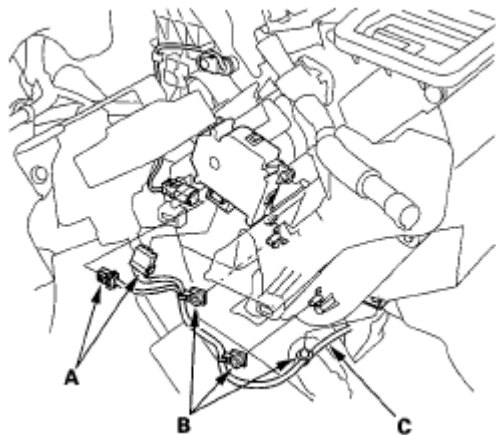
Identifying Driver's Air Mix Control Motor Connector And Wire Harness Clips And Wire Harness
